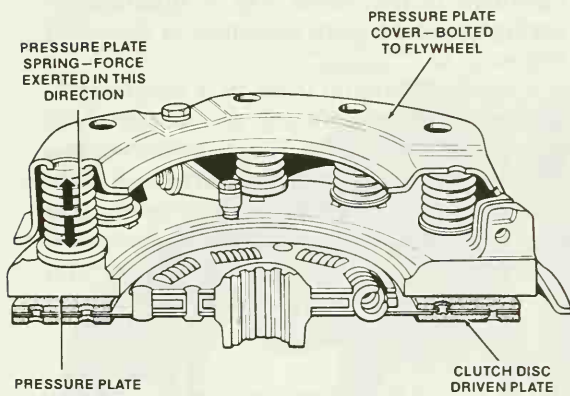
Cross-sectional view of a coil-spring pressure plate and disc. (Ford Motor Company)
